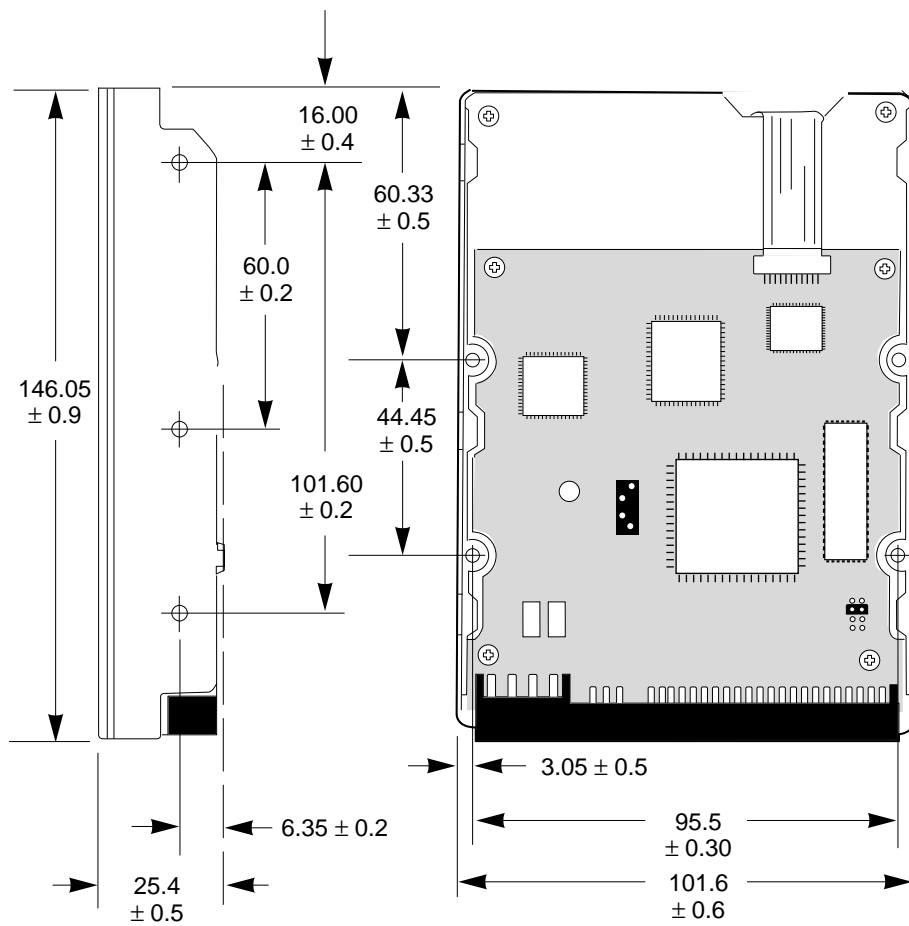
Mounting Dimensions for Quantum Fireball (Two- and Three-Disk) Drives
